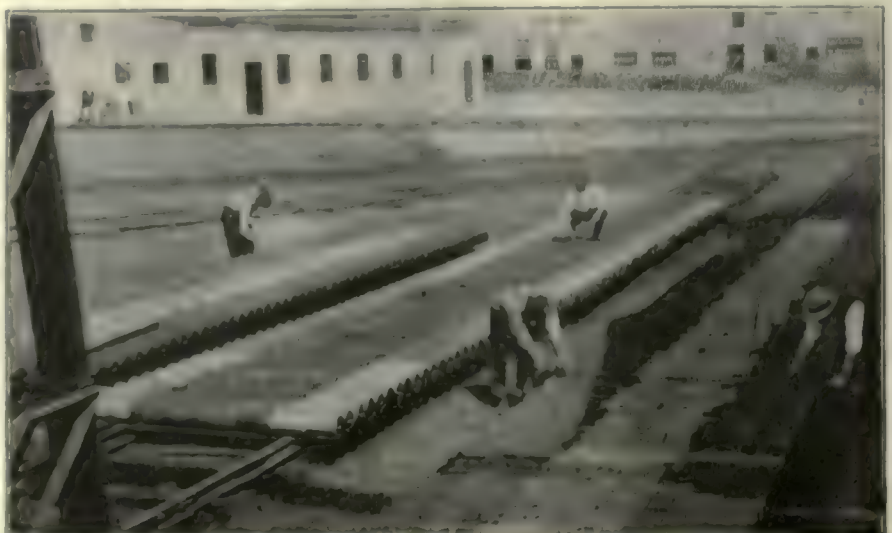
SIZE AND SURFACE INSPECTION JUST PREVIOUS TO SHIPPING
